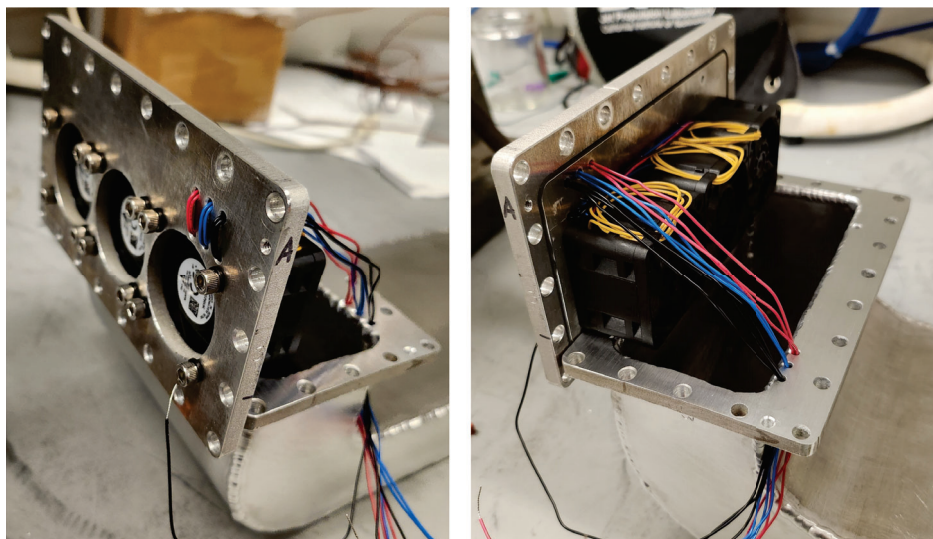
The fan wires go through the holes on the fan plate to the side inside the cooling chamber, then back out of the cooling chamber through the ram's horn welded flange. This wire routing strategy allows the fan wiring to be done before attaching the ram's horn to the cooling chamber.
